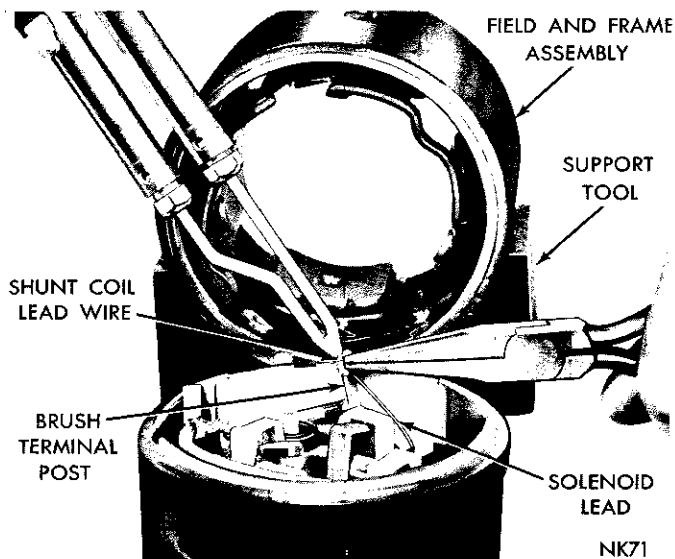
Unsoldering the Shunt Coil Lead Wire
